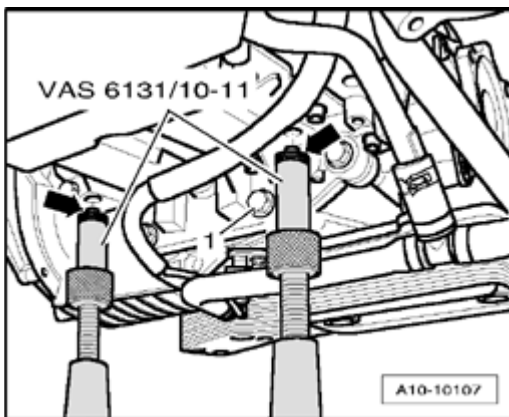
Placing Two Washers On Mounting Pins Of Support Elements VAS 6131/10-11 At Rear Of Engine
